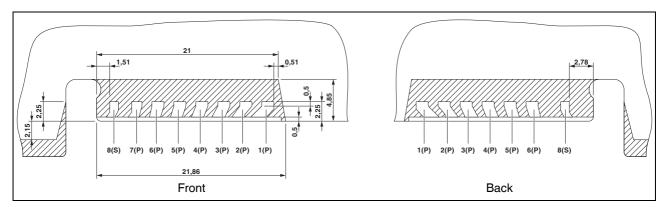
Detailed dimensional drawing of TBUS8-18,8-PPPPPPPS contact pads
